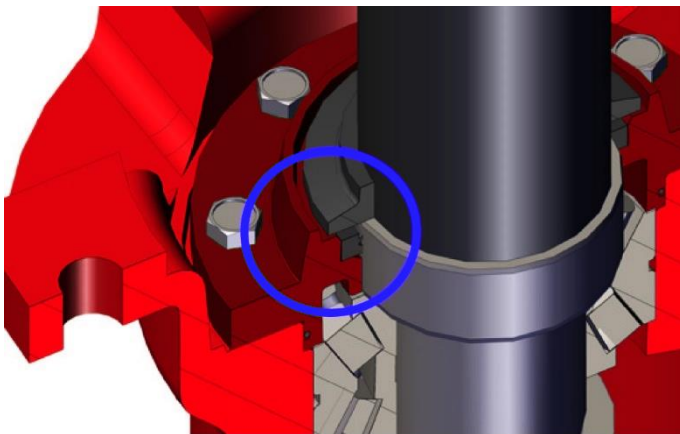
Rubber Lined Shaft with Flinger, Wet End Bearing and End Cover.
